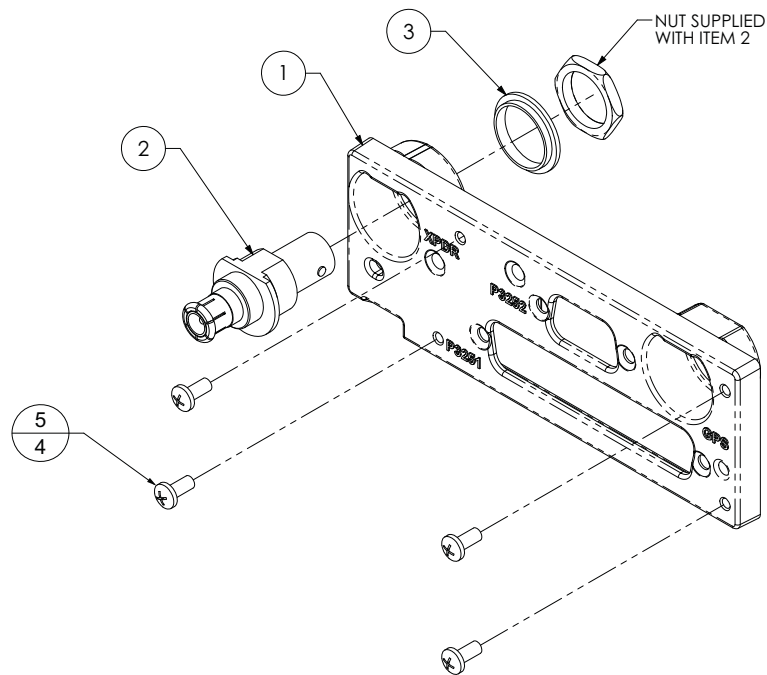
GTX 3X5 without GPS Back Plate Assembly (P/N 011-02976-00)
